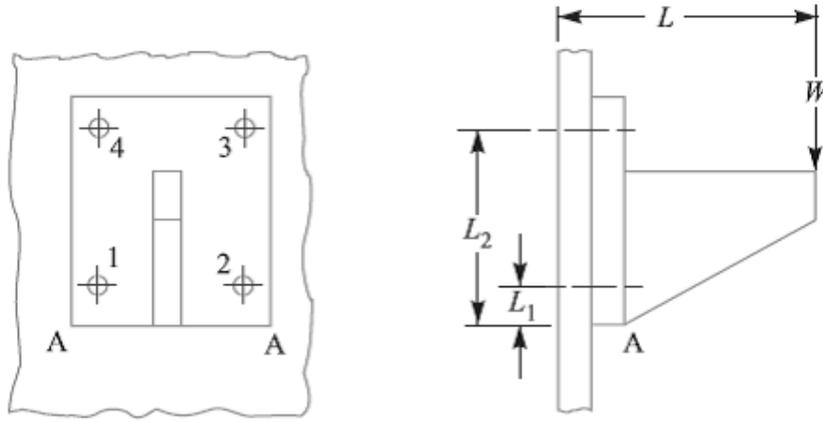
Eccentric load perpendicular to the axis of bolts.
